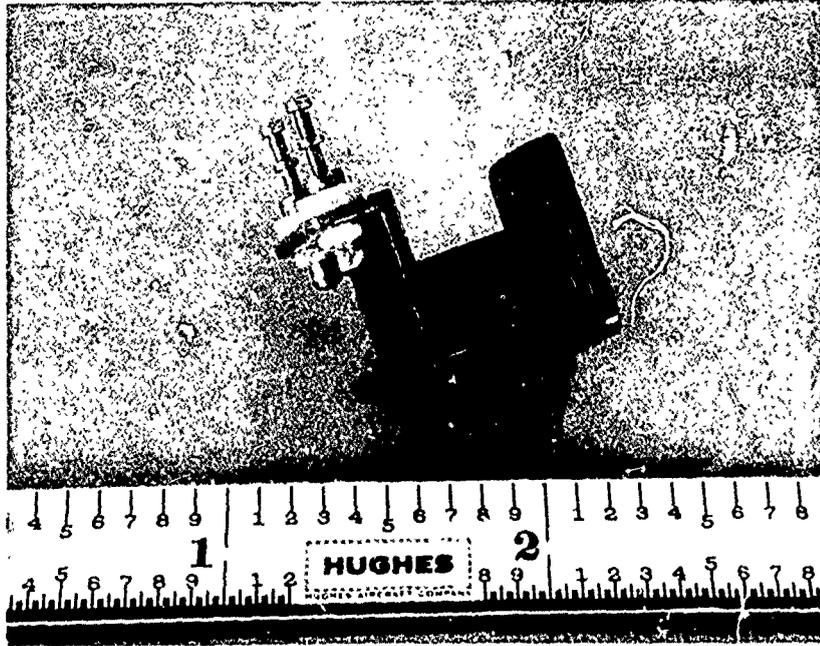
"L" shaped bobbin made from vacuum/pressure casting process.
